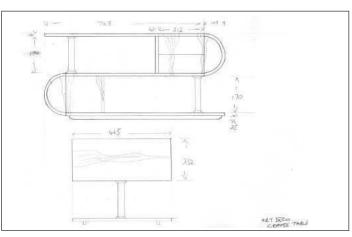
General dimensions also showing veneer flowing down through drawer fronts
